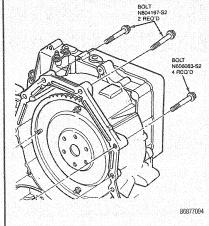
Remove the four torque converter housing bolts from the top of the transaxle
